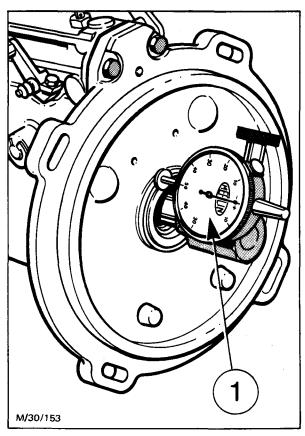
Measuring the Camshaft End Float (Dorset) 1. Dial Gauge
